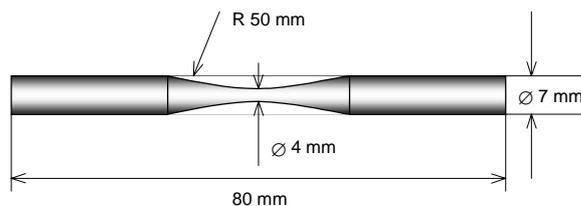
Schematic of the fatigue test specimen. (cylindrical hour-glass specimen)
